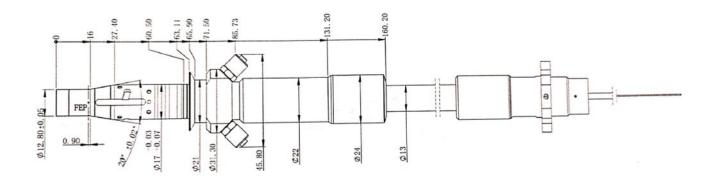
External dimensions of the RFL-HQBH fiber delivery cable connector
